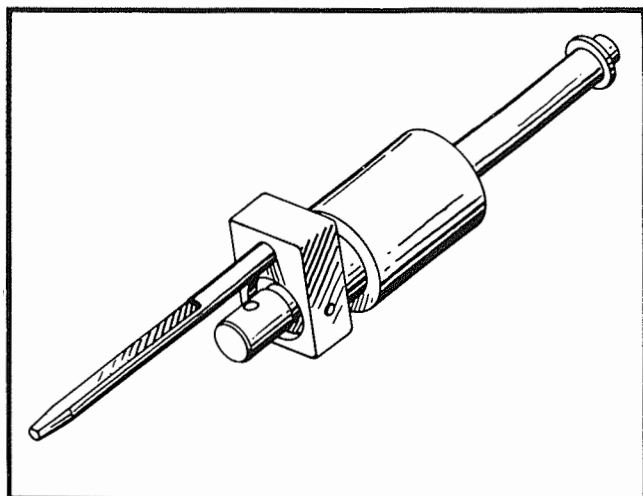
Supercharger Clutch Oil Control Valve Sleeve Installing Tool
